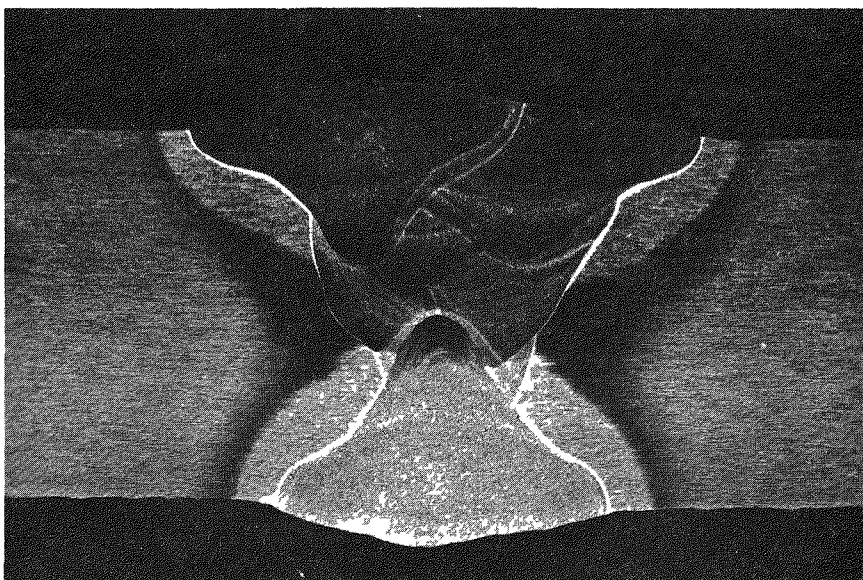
TYPICAL AREAS AND HARDNESS OF HEAT-AFFECTED ZONES IN THICK WELDMENTS OF 6061 -T6 ALUMINUM DUE TO WELD HEAT
